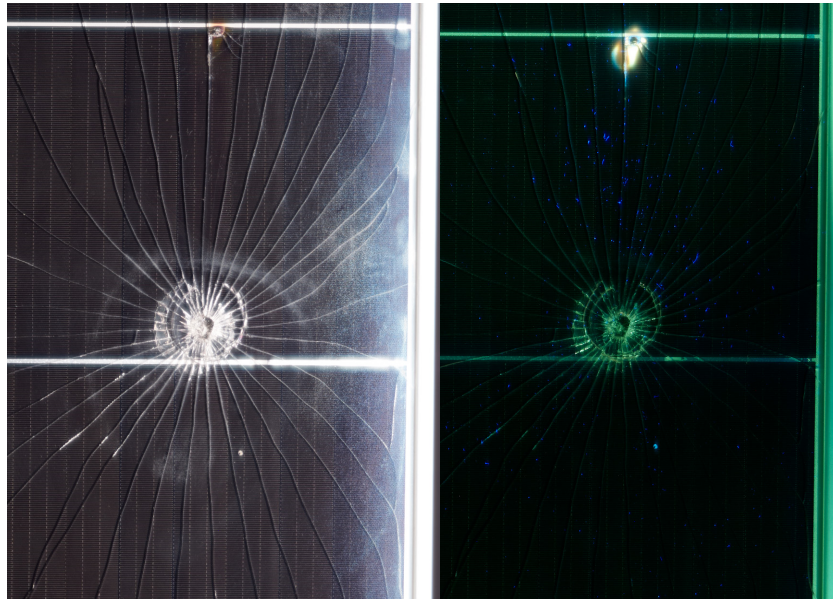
Close-up (left) visual inspection and (right) UVf images of the module in position #5.
